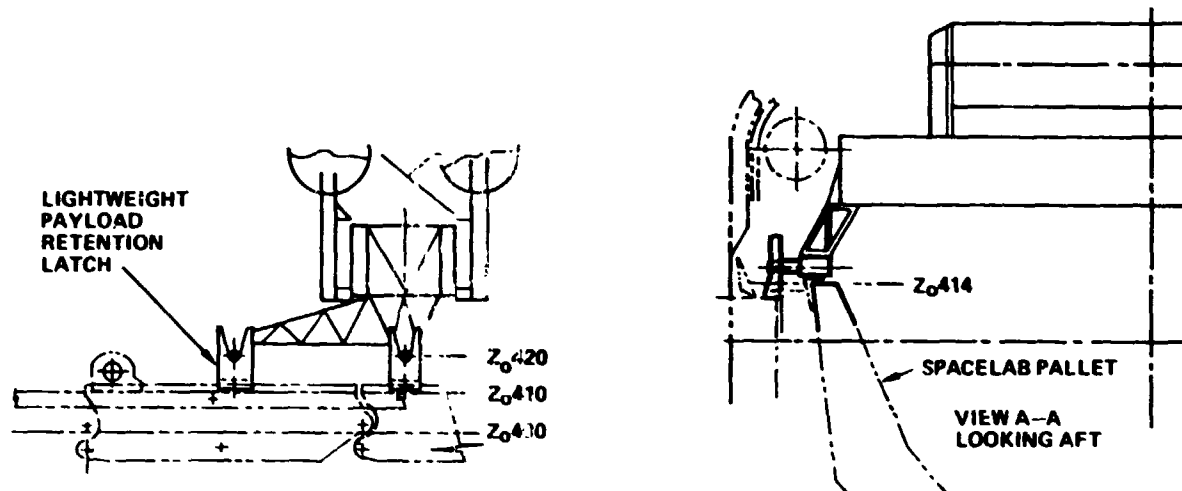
Array Deployment Assembly - Aft Bay Mounting
